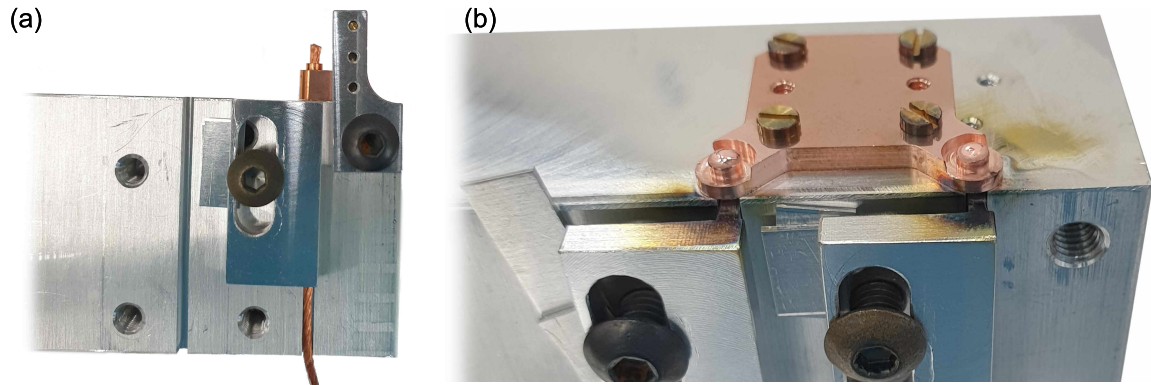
Welding of cooling braids. (a) Before TIG welding of an anker part of the copper cooling system. (b) After the welding process of a sample mounting plate. The tarnishing of the copper was minimized by the cooling block design. Afterward, the parts were gold-plated.
